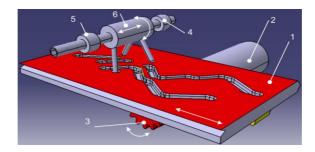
Gear box shifting mechanism with single DC motor: 1 – profiled plate, 2 – DC motor, 3 – sprung gear on DC motor, 4, 5 – sliding bearings, 6 – cylinder with prongs
